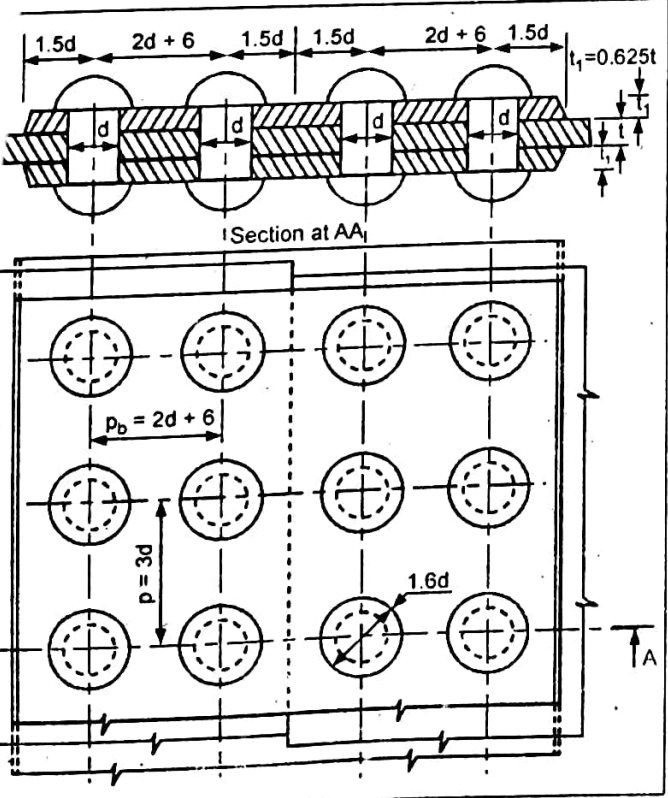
Double Riveted Double Cover Plate (Chain Butt Joint)
